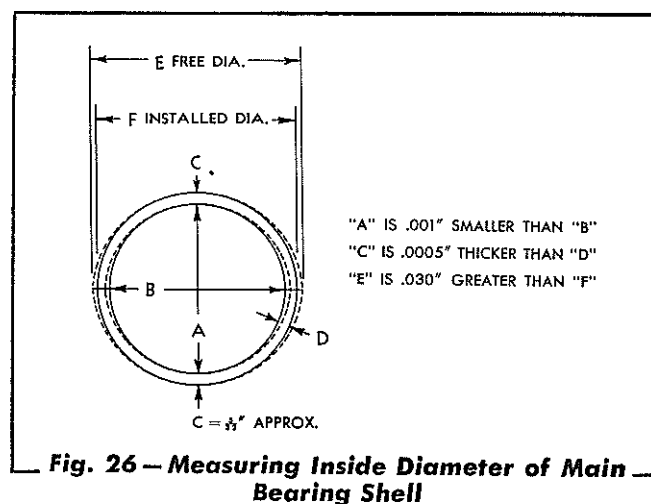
Measuring Inside Diameter of Main Bearing Shell
